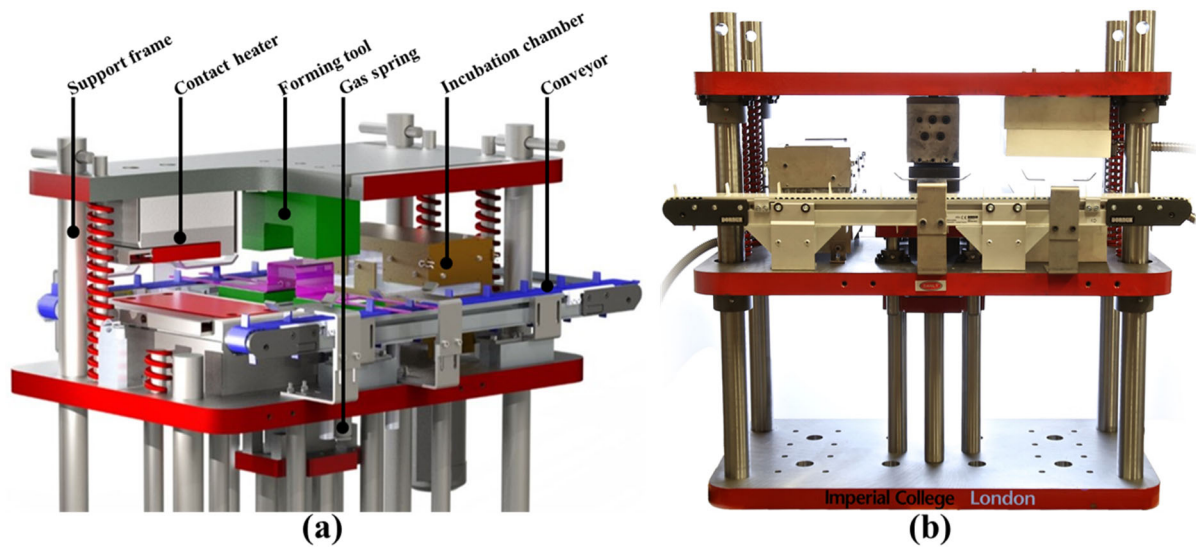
The *Uni-Form* pilot production line (a) design in 3D view and (b) final assembly.
